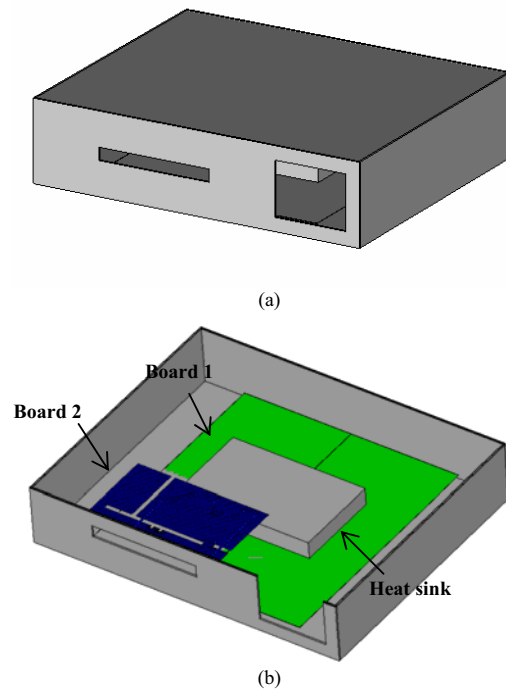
Three dimensional (3D) view of the metallic enclosure.
